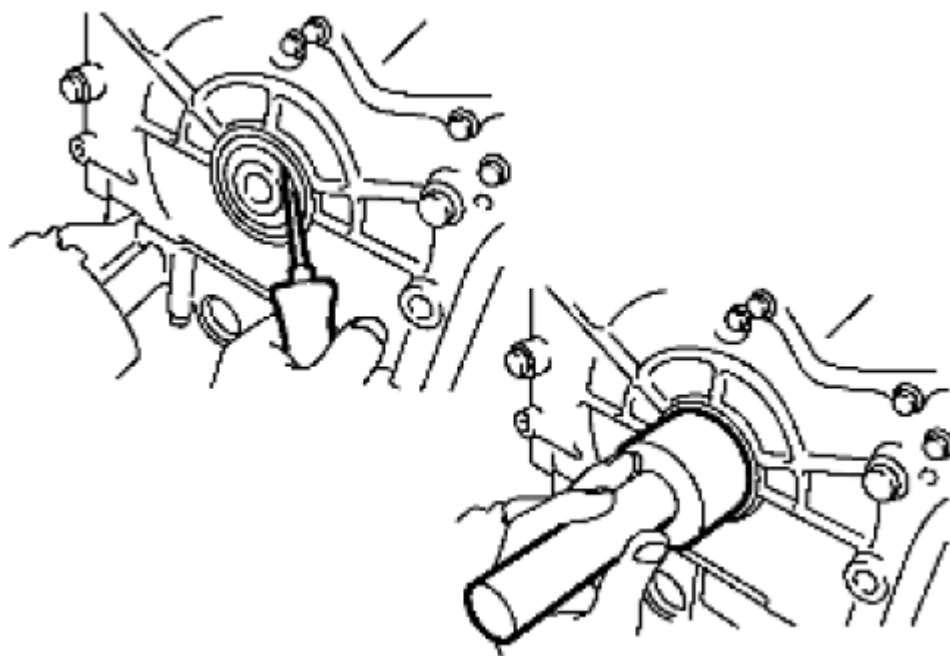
Removing Front Oil Seal Using Suitable Tool
